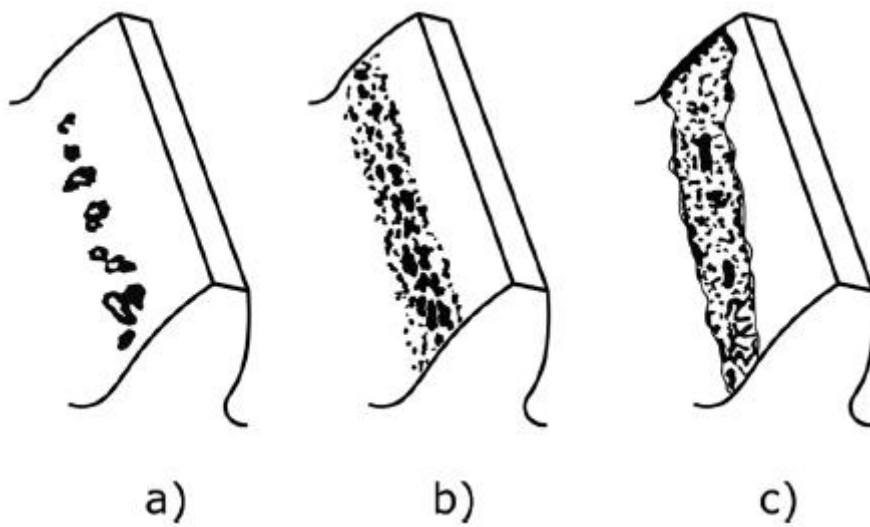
Tooth pitting: a) Pitting - alloy steel ($R_m = 900$ MPa), b) Pitting - hardened cast iron, mild steel ($R_m < 500$ MPa), c) Pitting (nitrided gearing).
